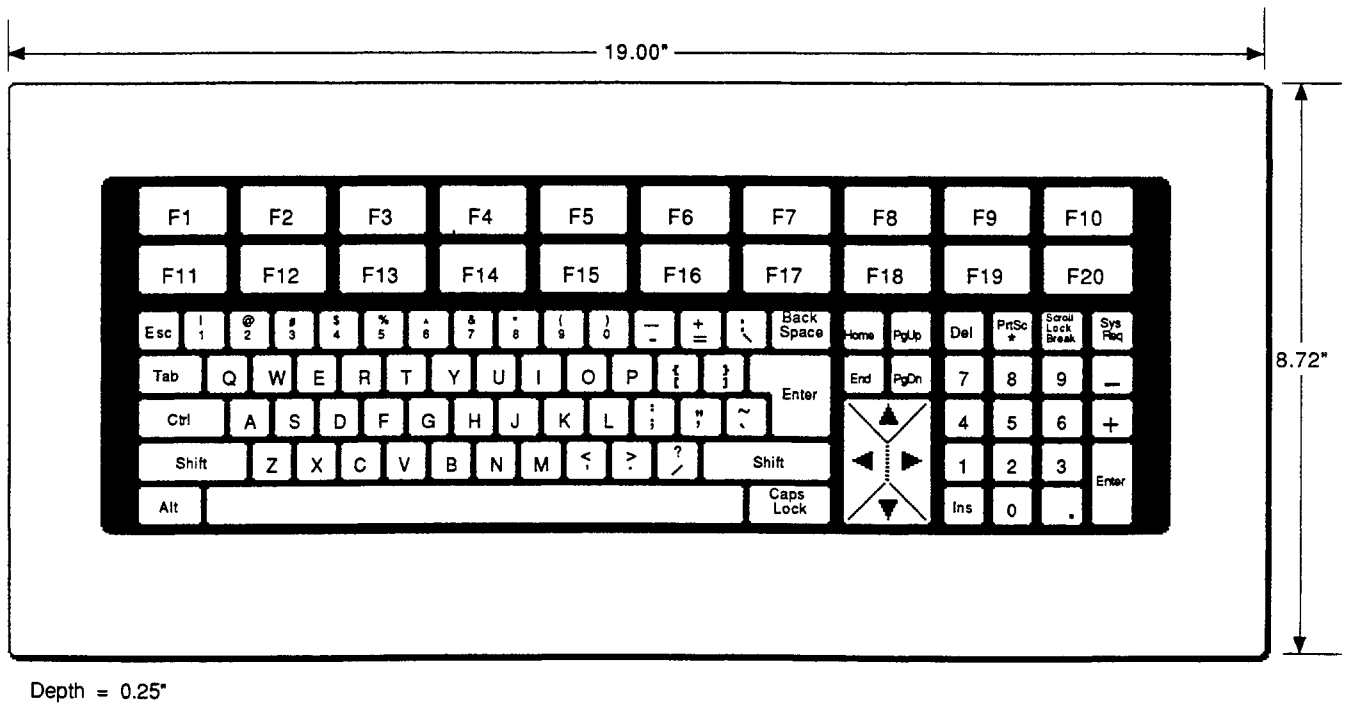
8000-KB5 Keyboard with Dimensions
